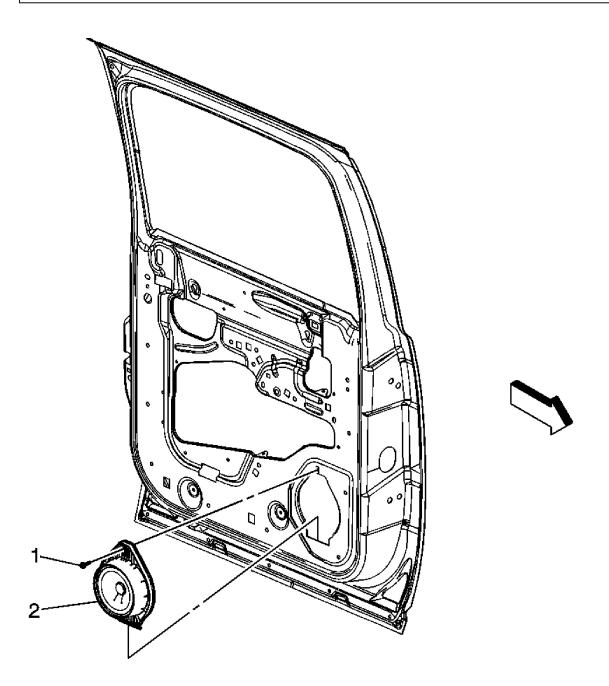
Radio Rear Side Door Speaker Replacement (Crew Cab) Courtesy of GENERAL MOTORS CORP.
